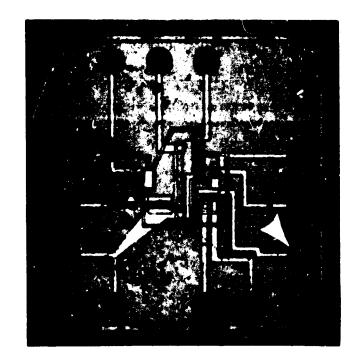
Test module chip after removal from printed circuit board. This chip had no evidence of electrolytic etching of the metalization. A magnified view of the collector pad is shown in Figure 16.
